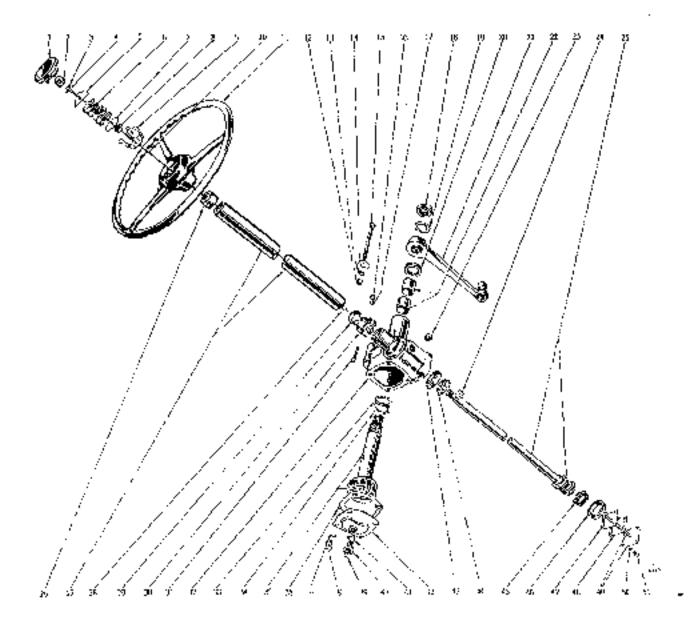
Steering Gear (Disassembled View) (1938 Model, Typical of 1936-37 Models)
